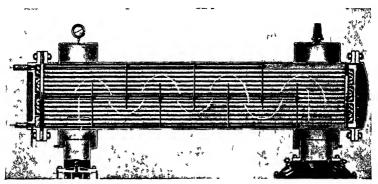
Adequate baffling of air space produces maximum cooling. (Courtesy of Bury Compressor Co)
